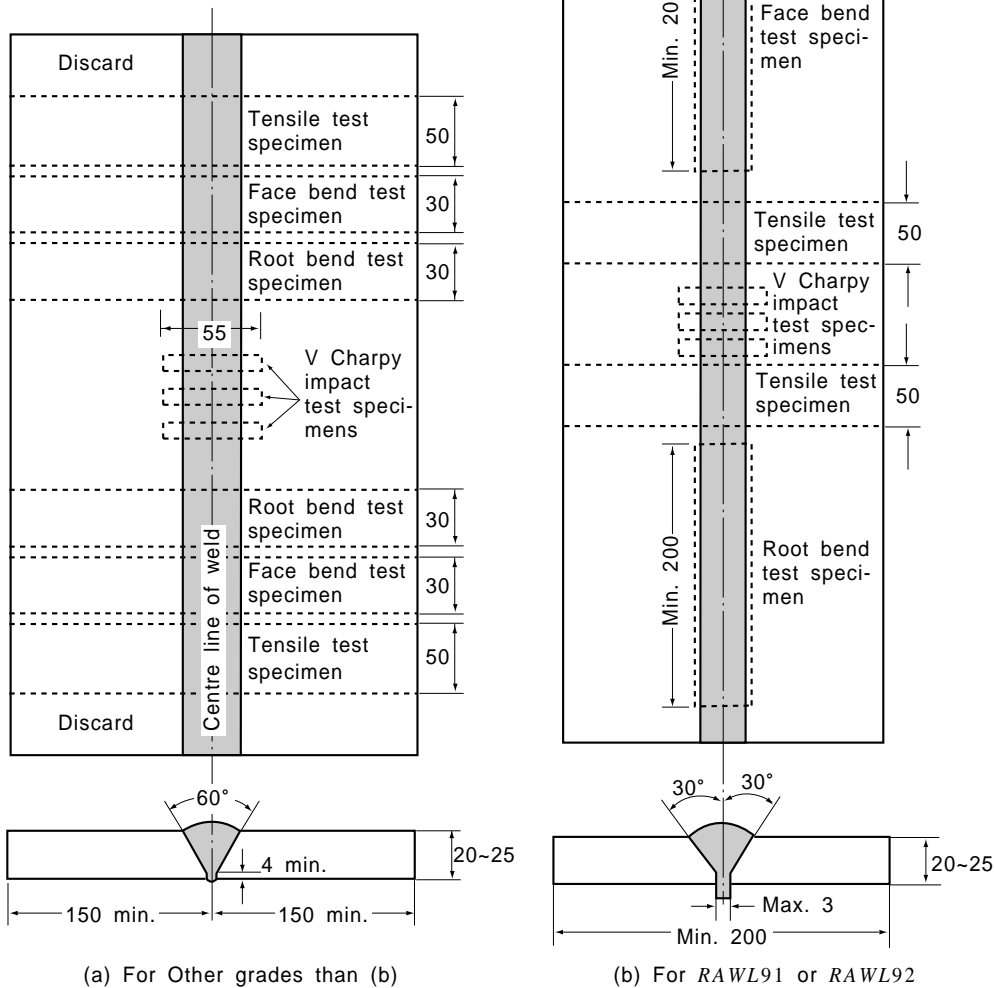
Butt Weld Test Assembly with Multi-run Technique (Automatic welding, Unit : mm)
